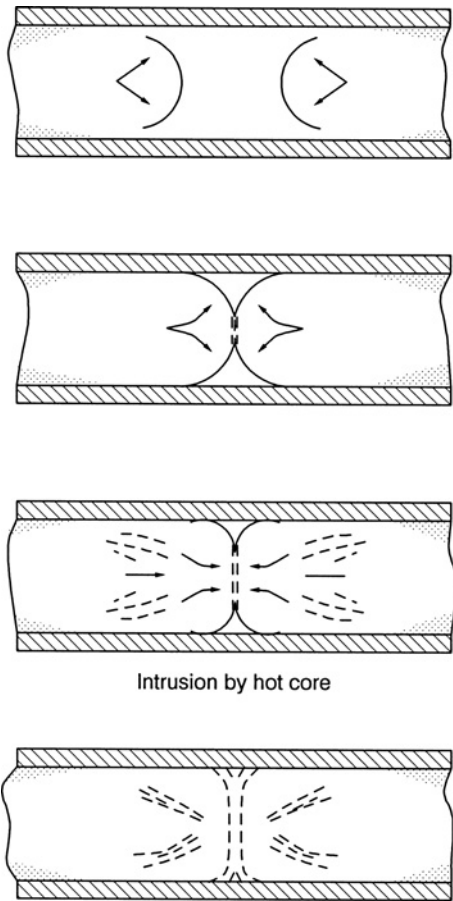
Impingement of two fronts during injection molding to form a weld line. (Reprinted by permission of the publisher from Hobbs, 1974.)
